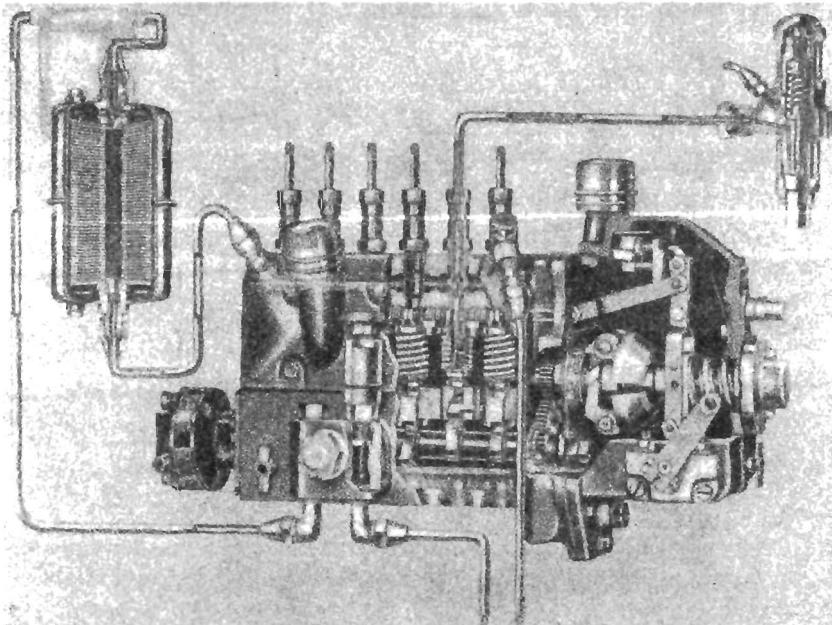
Bosch fuel injection system (courtesy of American Bosch Corporation).
